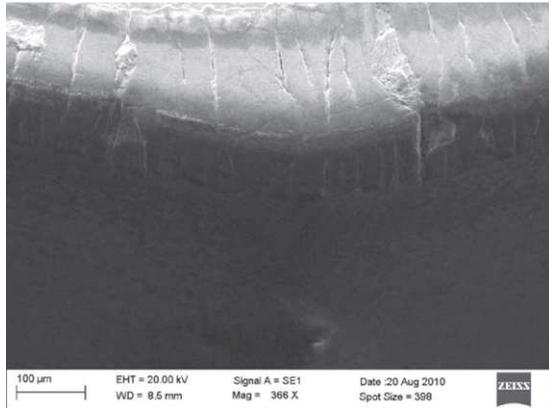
Tool cutting edge after machining material A at 600 m/min.
